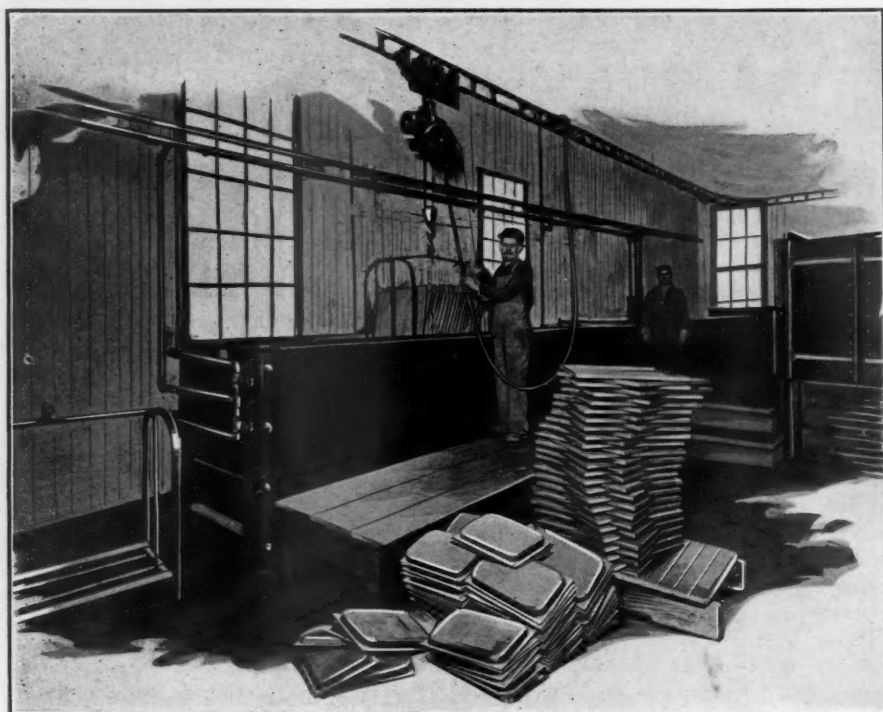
View of the pickling room showing monorail system and "Little David" air hoist for transporting material.
